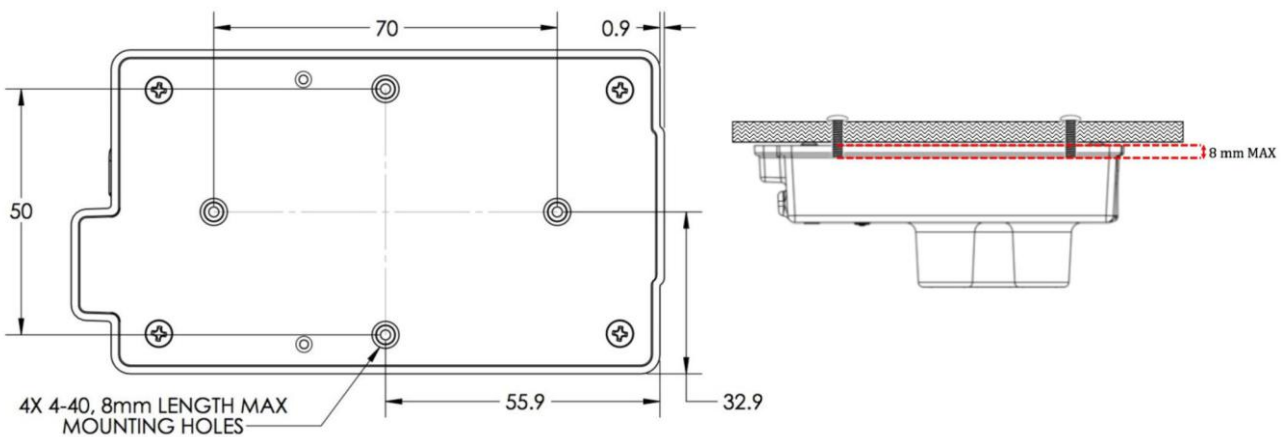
Back dimension with screws details and foam protection for vibrations.
